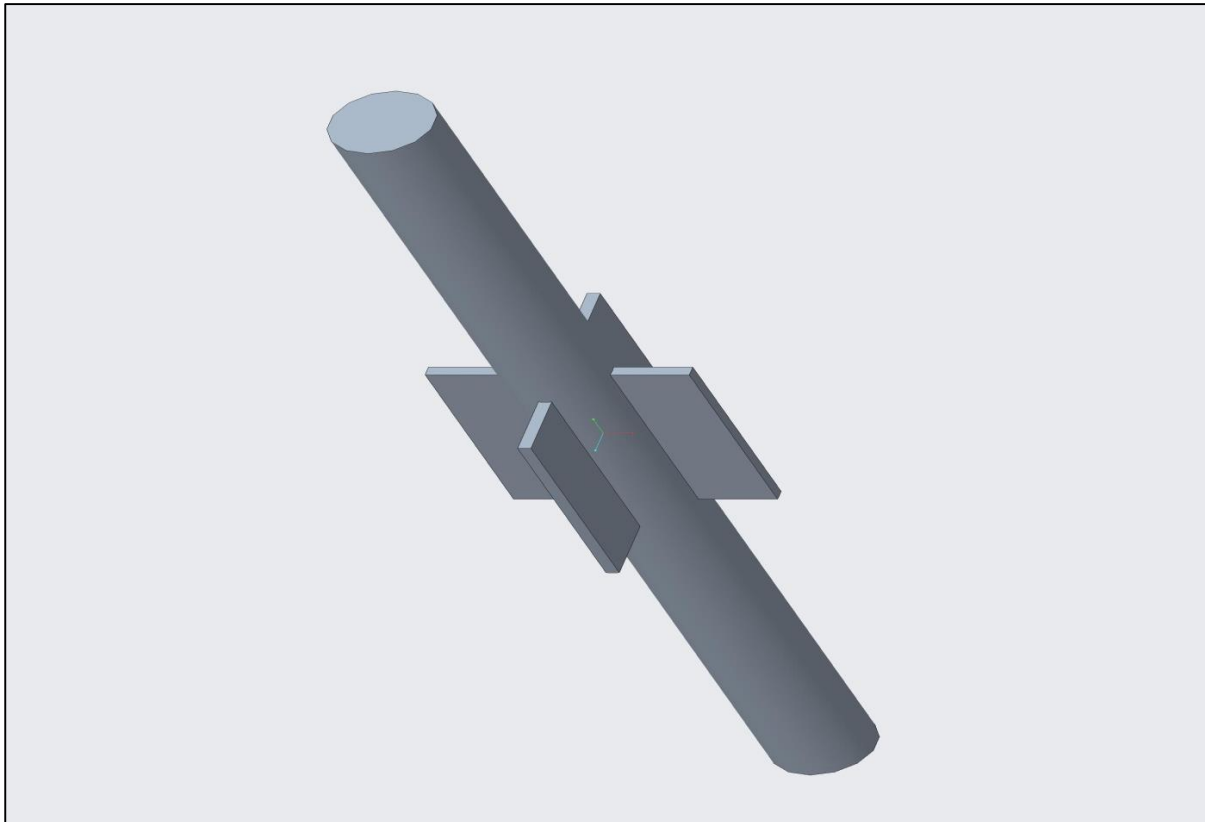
Solid Model of Spline Shape Electrode with straight blade used in investigation
